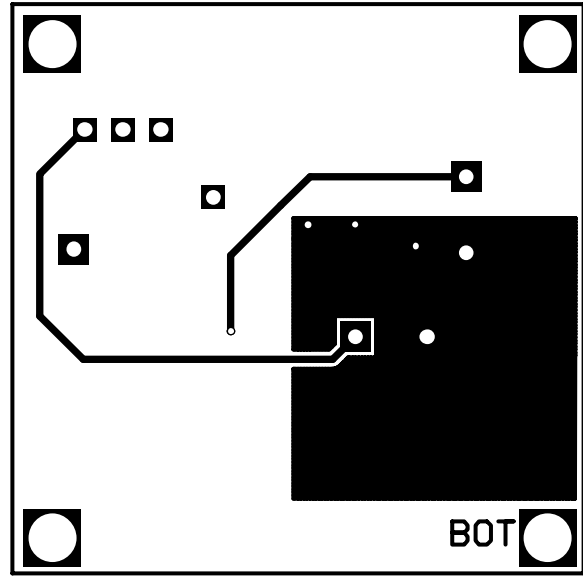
Sample Application Circuit Board Layout (Bottom Layer)
